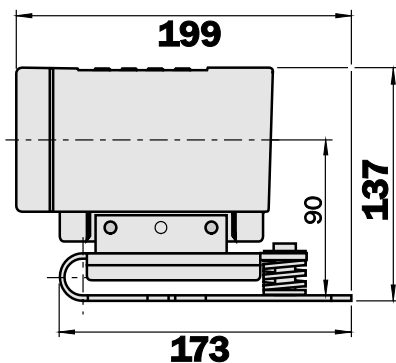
Dimensional Drawing of DME4000 Mounted on Bracket
